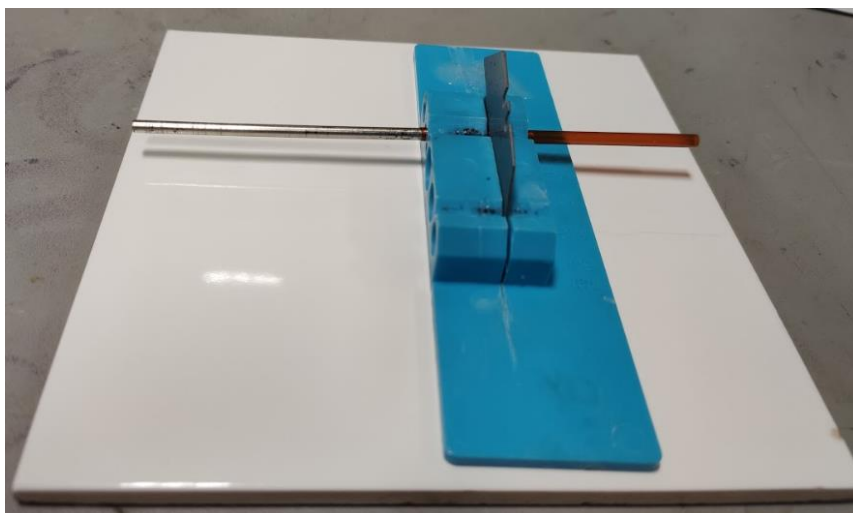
Photograph of Kapton[®] tube cutting set-up.
